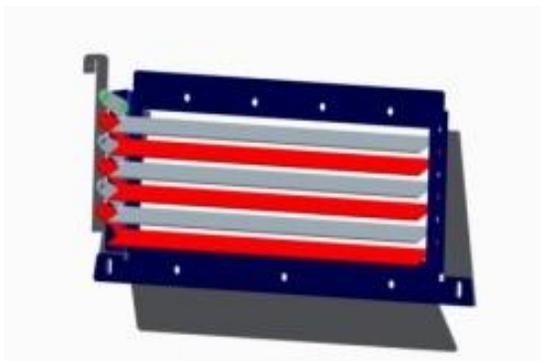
The louver assembly is composed of six louvers attached to one operating lever. The diverter attaches directly to this sub assembly.
